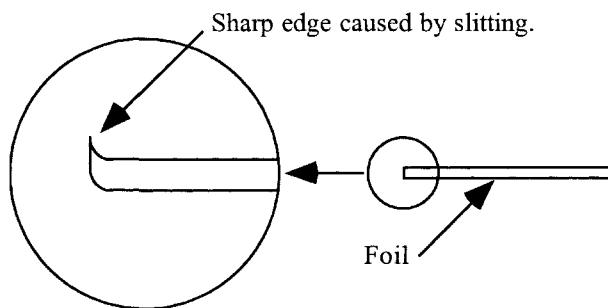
Foil with Sharp Edge Burrs after Slitting.
